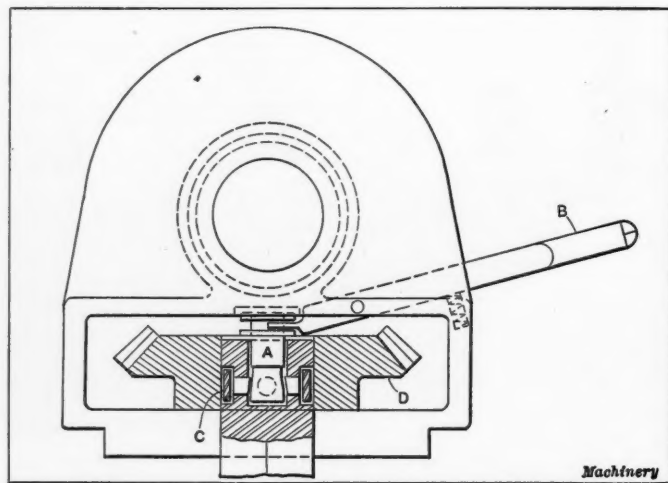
Clutch for Starting and Stopping Lathe Spindle
